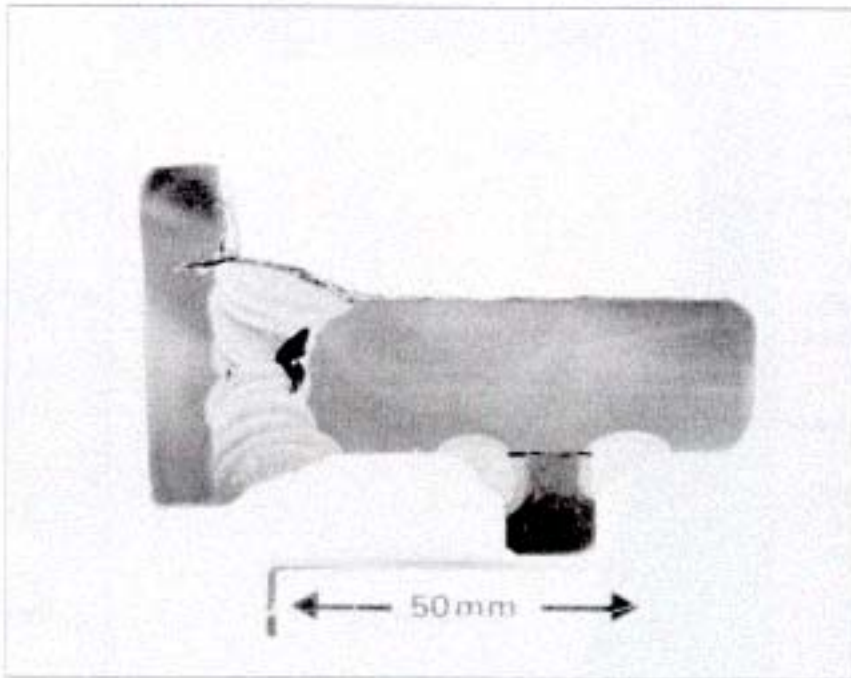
Shell to bottom tube plate weld showing fatigue crack and apparent welding defects
